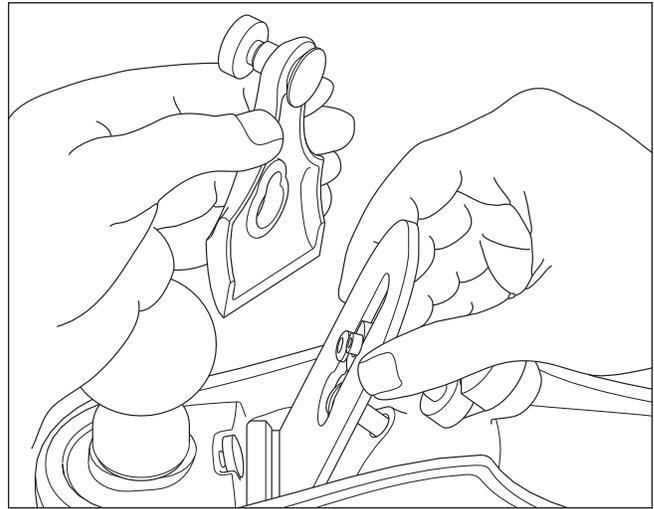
Removing the lever cap and blade. (Cap iron not shown.)
